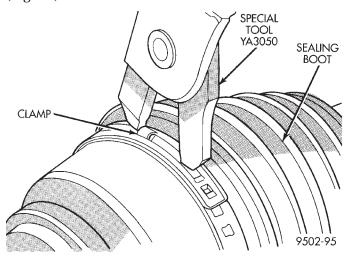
Clamping Tool Installed on Sealing Boot Clamp
